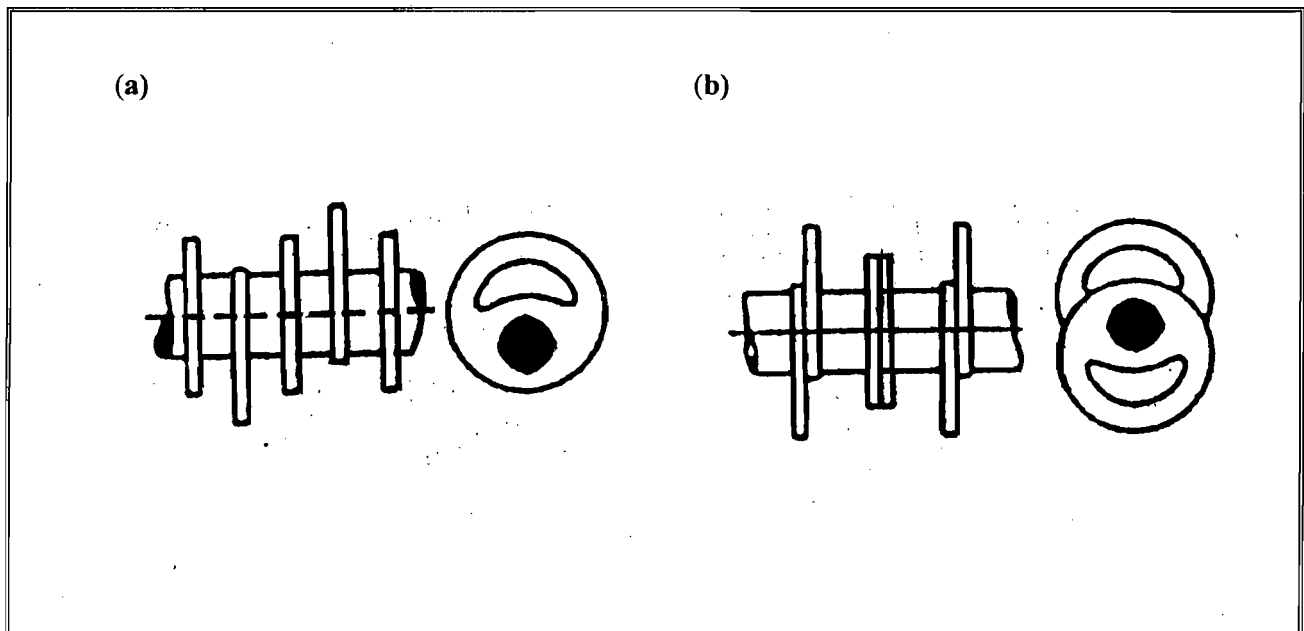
Impeller configuration in (a) the Netzsch Molinex LME 20 bead mill and (b) the Netzsch Molinex LME 20 “double disc” bead mill (Schutte *et al.* 1986).
